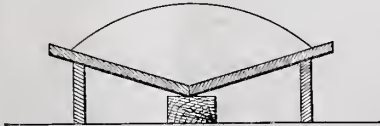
Section Through Nail Bin, A B. —Fig. 4.—Scale, 3/4 Inch to the Foot.
